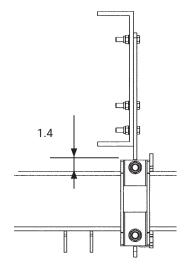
The frame mount requires at least 1.4" of space between the vehicle chassis and the support frame
